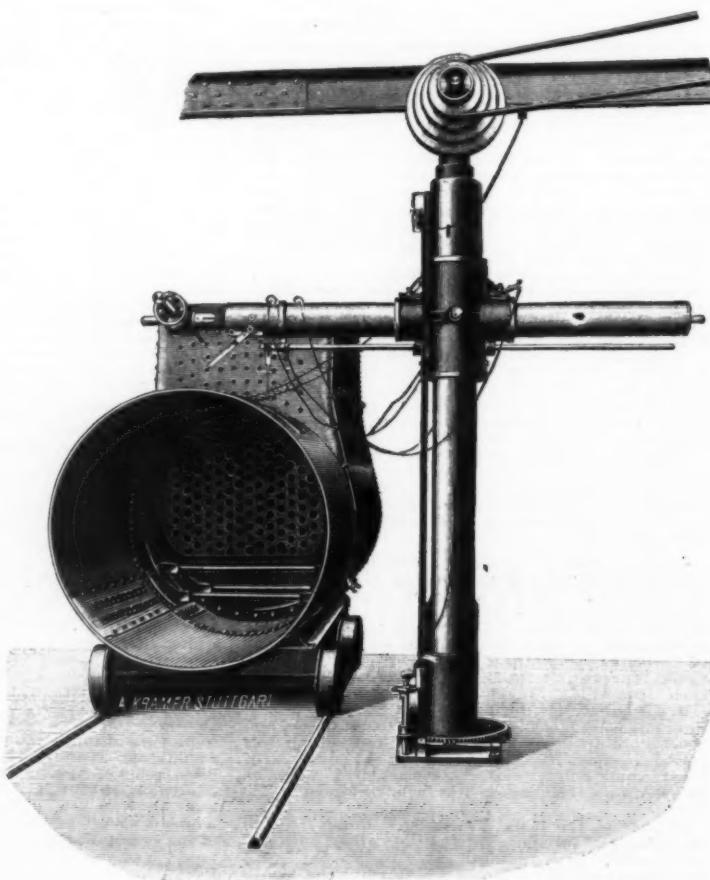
DRILLING BOLT-HOLES IN EXTERIOR OF A LOCOMOTIVE FIRE-BOX.
